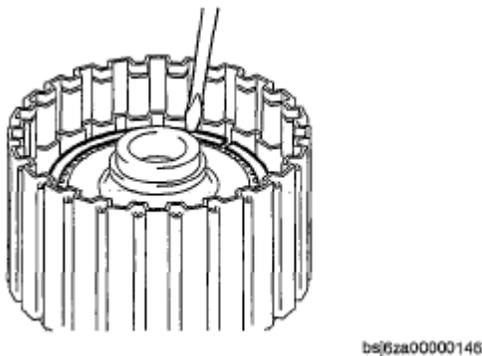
Removing Snap Ring From Input Shaft Component Using Flathead Screwdriver
